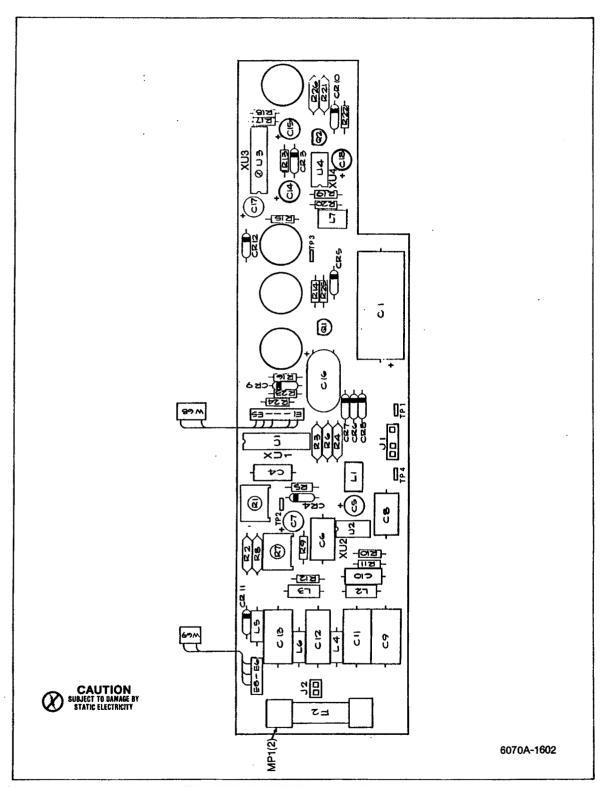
A5A2 P/S Regulator PCB Assembly
